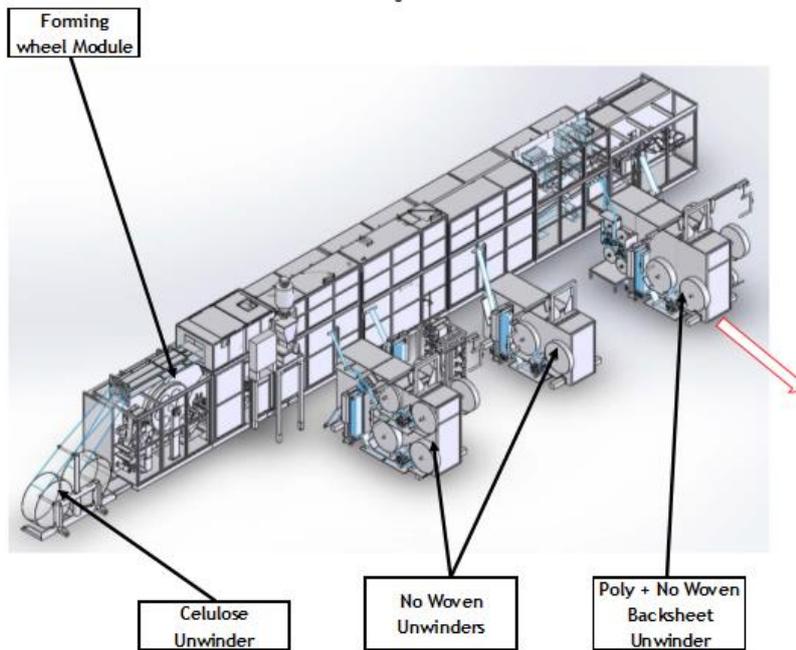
Baby Diaper Converting Machine (www.zuiko.co.jp).
